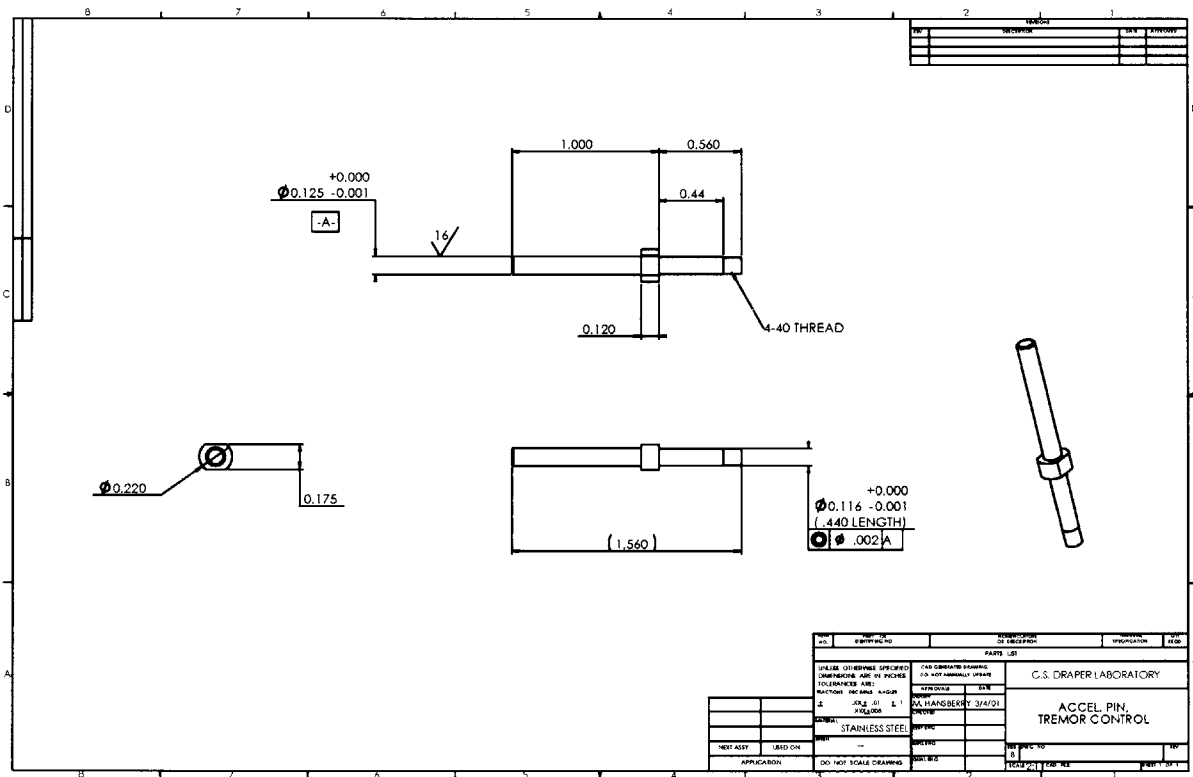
Mechanical drawing of the proof mass guide pin mounting through the accelerometer.
